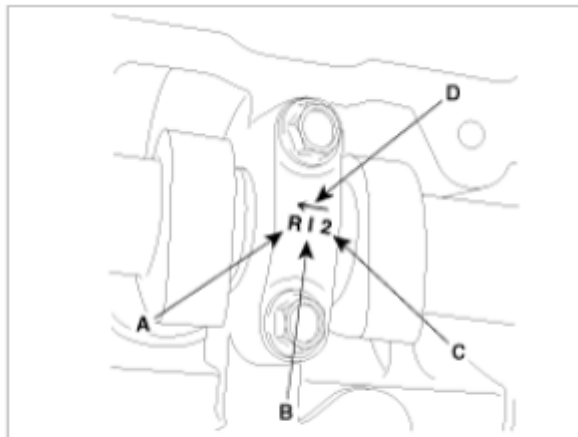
Identifying LH/RH Camshaft Bearing Cap And Thrust Bearing Cap
